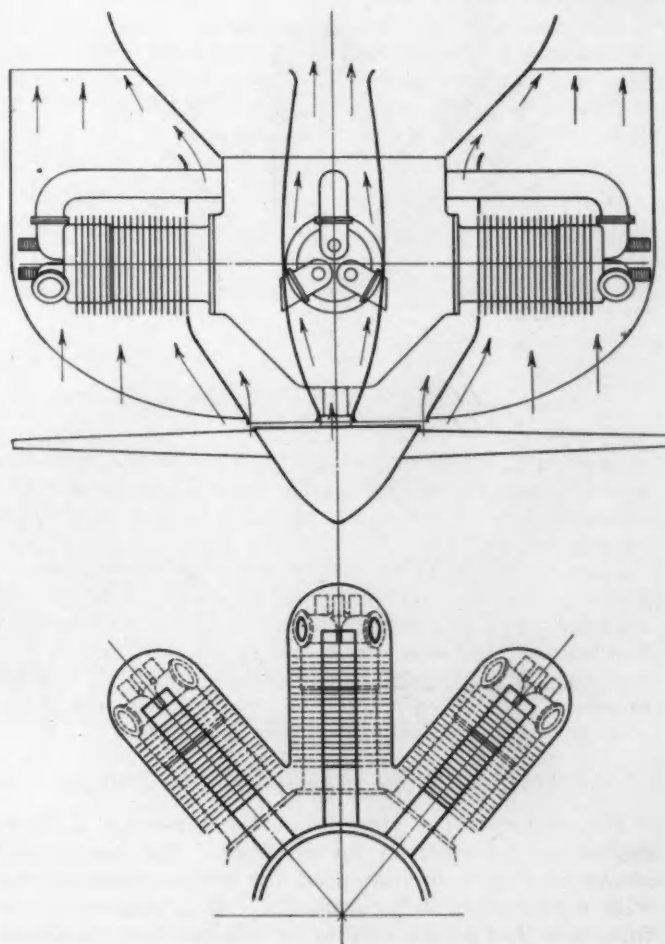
CRUSADER COWL USED ON BRISTOL JUPITER ENGINE
